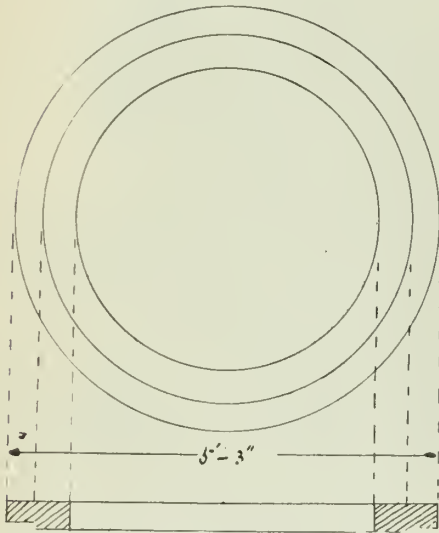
JUNK RING OR FOLLOWER FOR PISTON, 63" DIAM.
